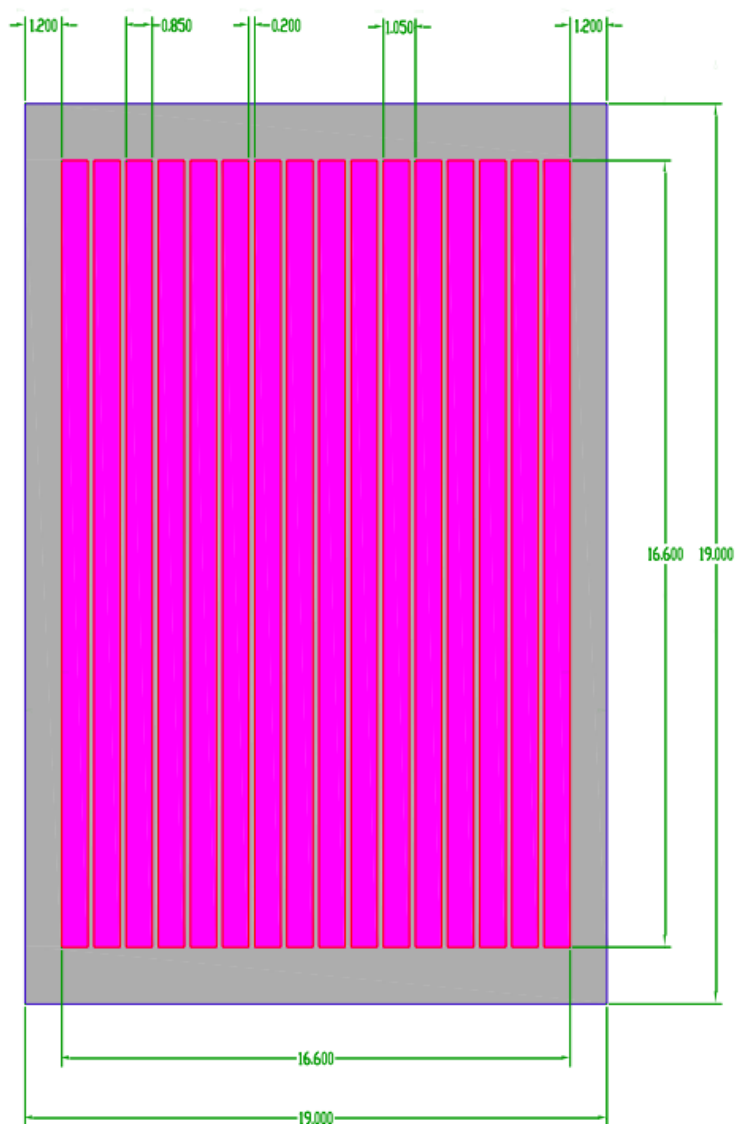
Technical drawing of the CdZnTe cathode layout. Measures are in millimeter. Generated by Baltic Scientific Instruments.
